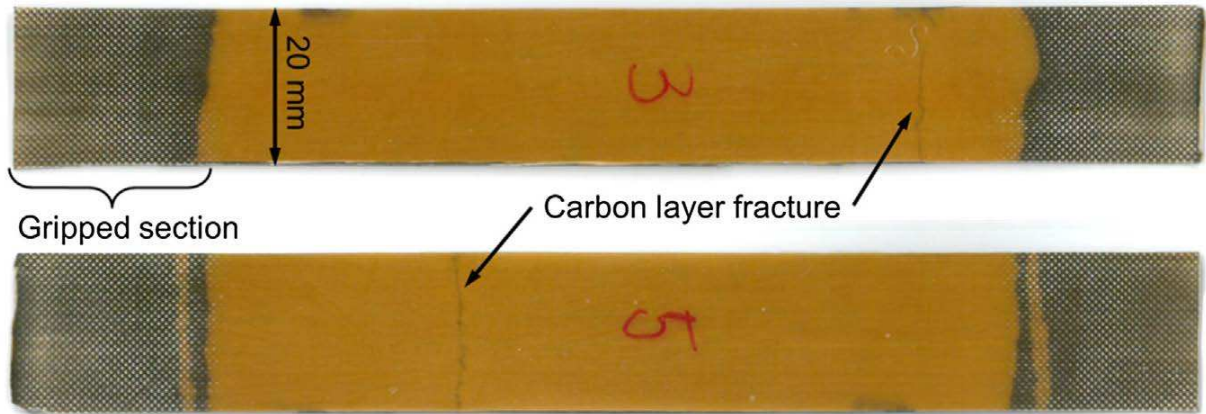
Clear gauge section failure in carbon fibre / glass sandwich specimens [9]
